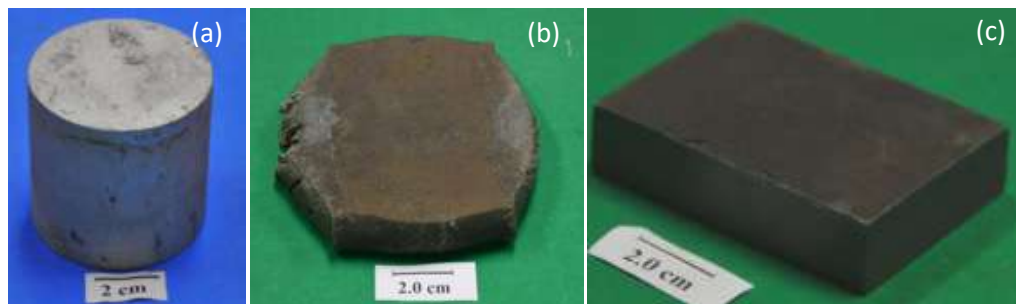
Cb-752 alloy (a) as solidified ingot, (b) after hot upset forging and (c) after further forging to plate form.
